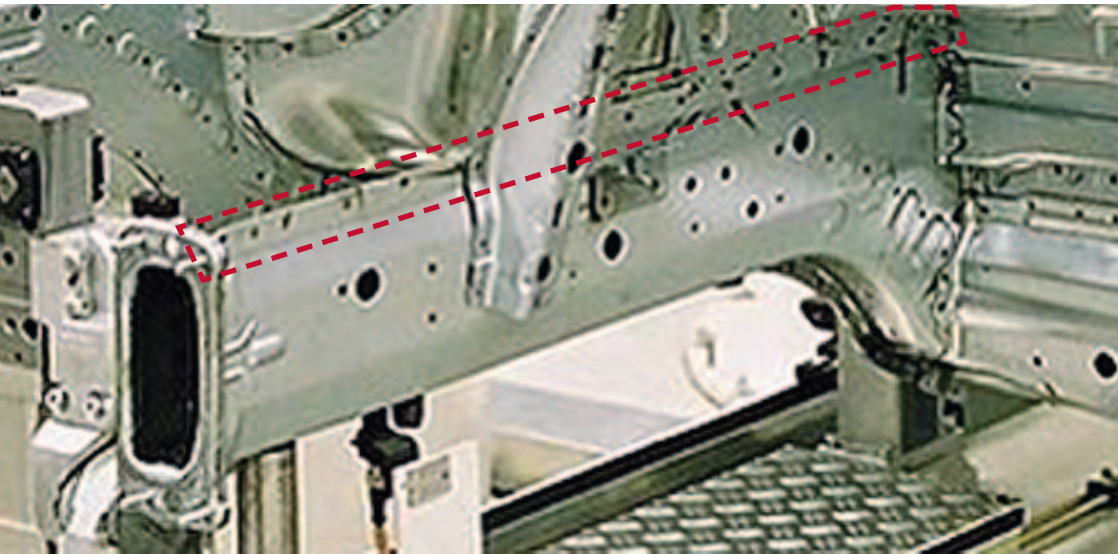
Light vehicle frame rail consisting of two halves that are spot welded together to form a hollow rail. Spot welds are made every few inches along the weld flange, shown in the dotted red box. Structural adhesives can be placed along the weld flange prior to joining the halves to create a continuous bond line.
